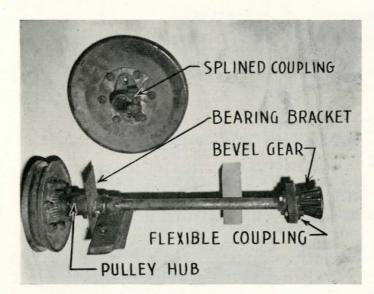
Convenient pulley sizes are 8-inch and 12-inch or 6-inch and 9-inch. Note flexible coupling, roller bearing, and pulleys. The shaft is a 1-inch steel shaft. The flexible coupling could be an old auto universal joint or flexible fabric coupling as used on some of the older autos.
